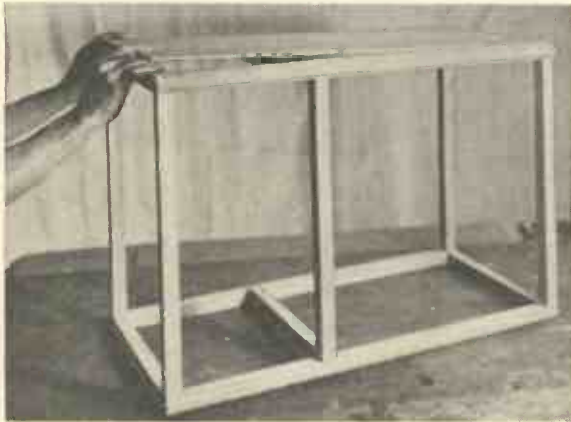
THIS SHOWS A SIDE BEING LAID IN.
